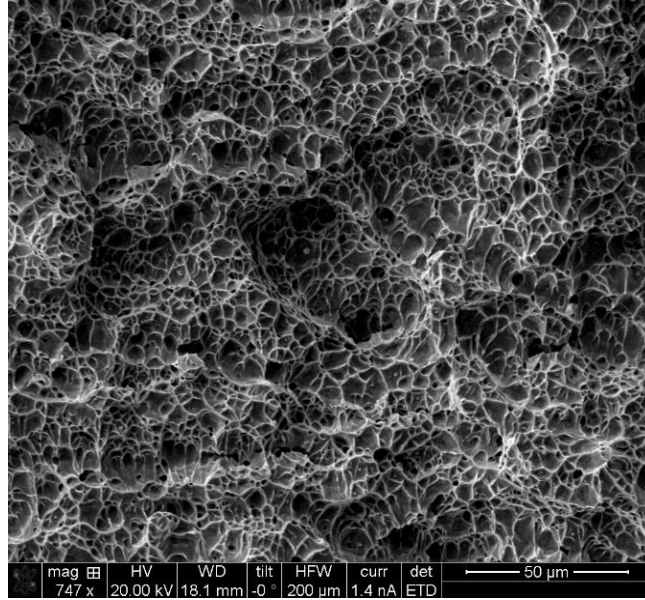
Dimpled CVN fracture surface, characteristic of ductile fracture.
